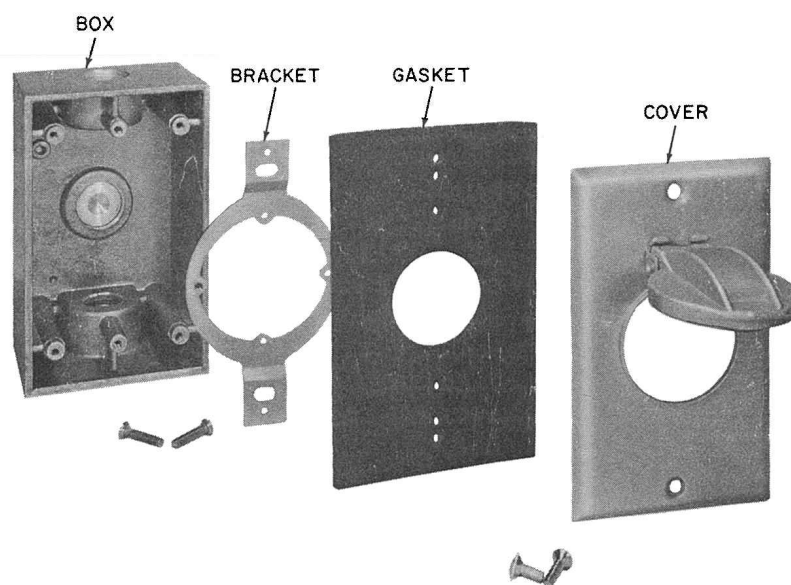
KS-19316, List 1 Weatherproof Housing
